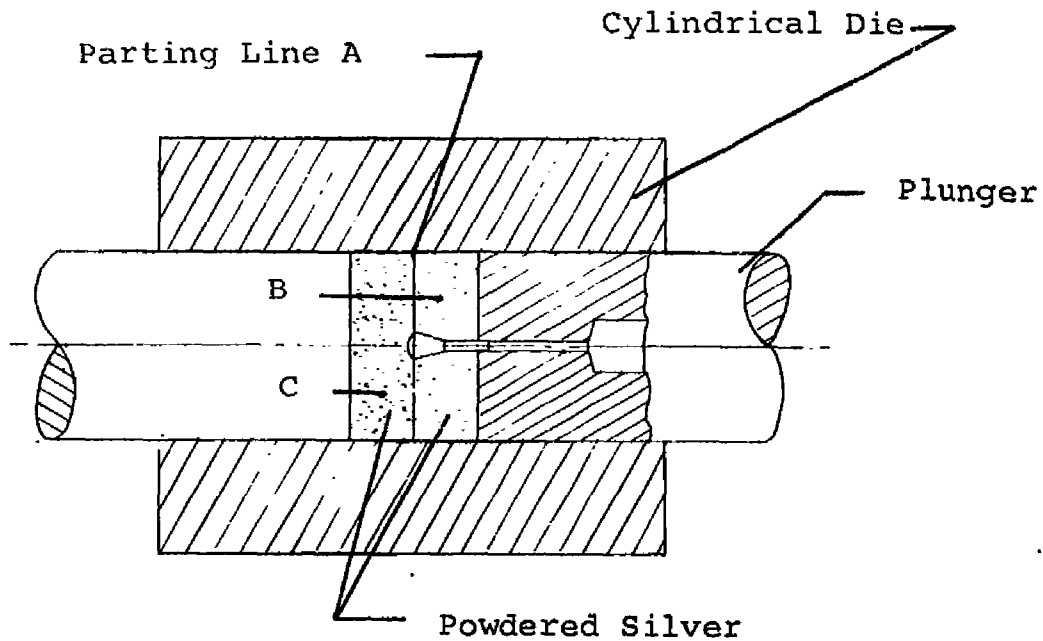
Die Cavity for Forming Sintered Silver Indium Heat Sink
